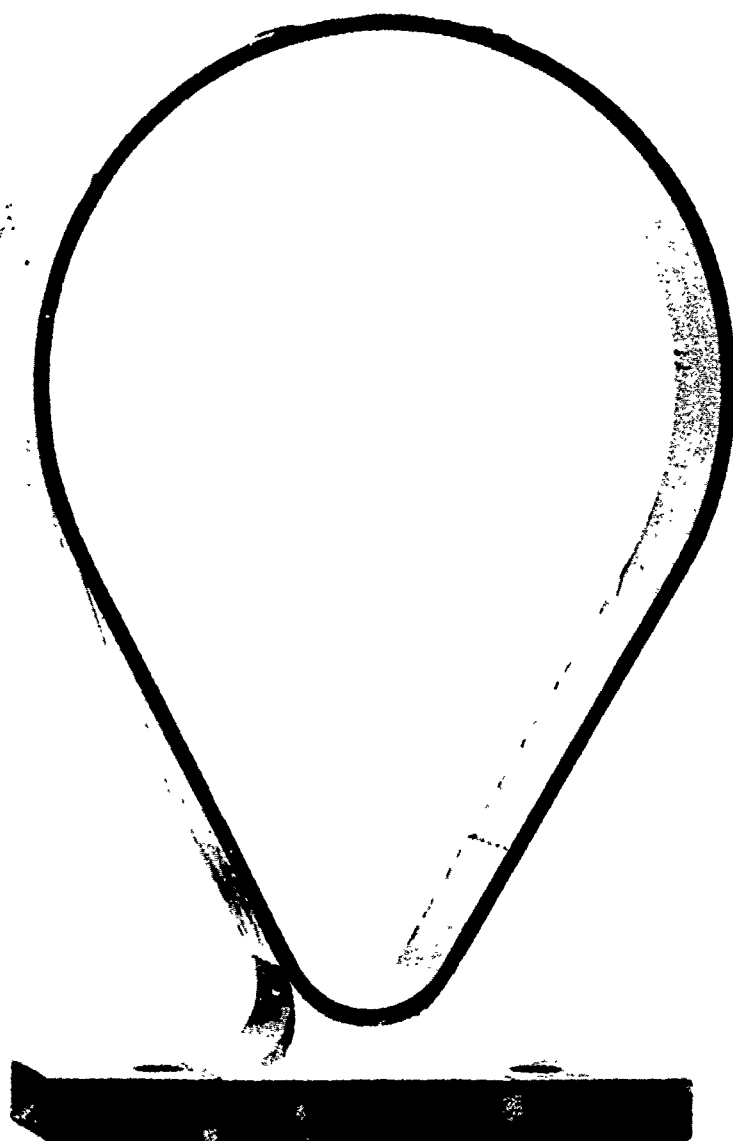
Z3578686-507 BONDED FILLET JOINT TENSION SPECIMEN
